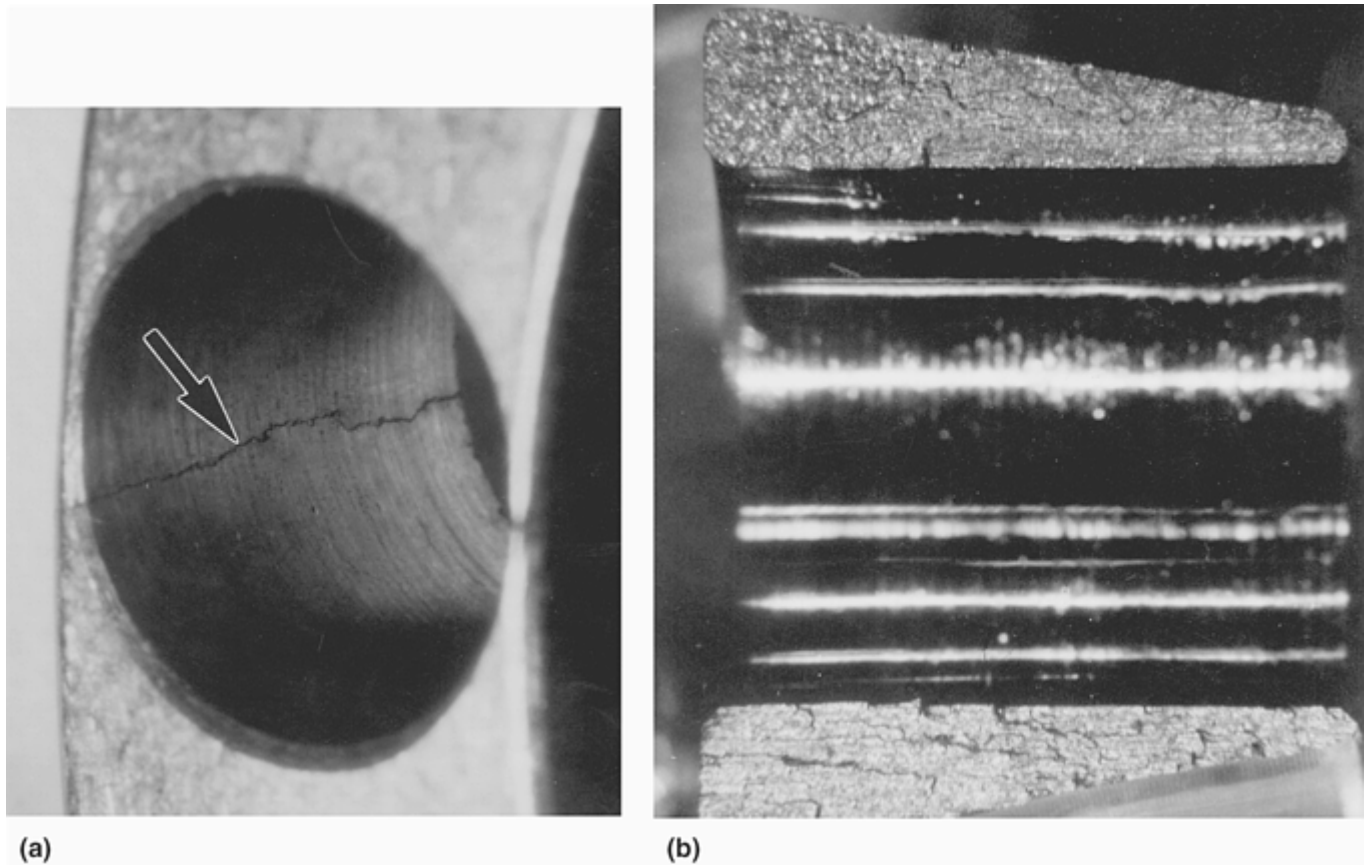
Crack (a) and broken-open fracture surface (b) of failed wedge-shaped middle tapered ring. 6×
